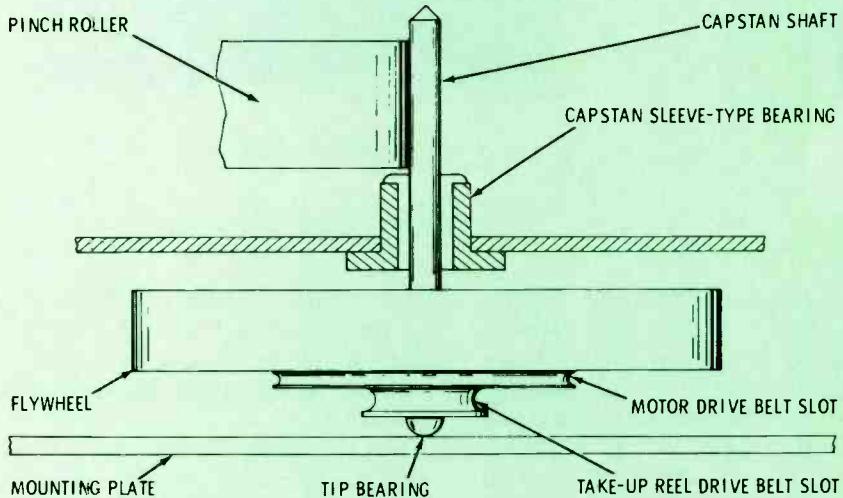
Side-view drawing of capstan and flywheel assembly used in most automotive cassette tape players.
